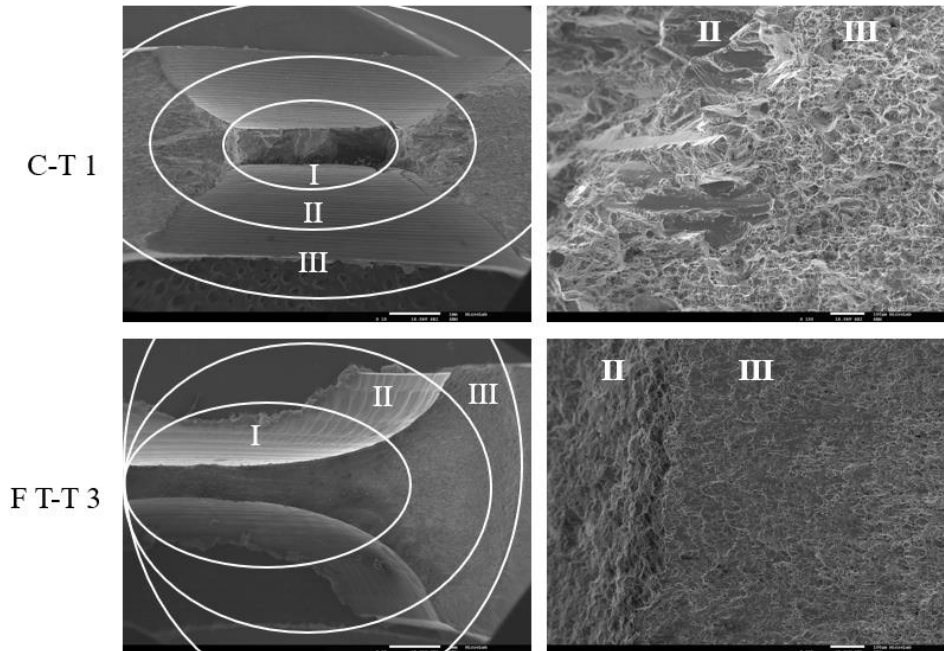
C-T 1 and F3 T-T fatigue crack surface with the three crack propagation stages identified.
